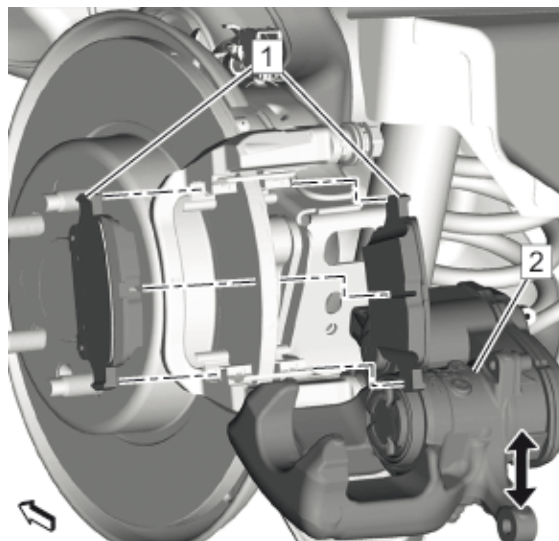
Rear Brake Caliper And Rear Disc Brake Pads
